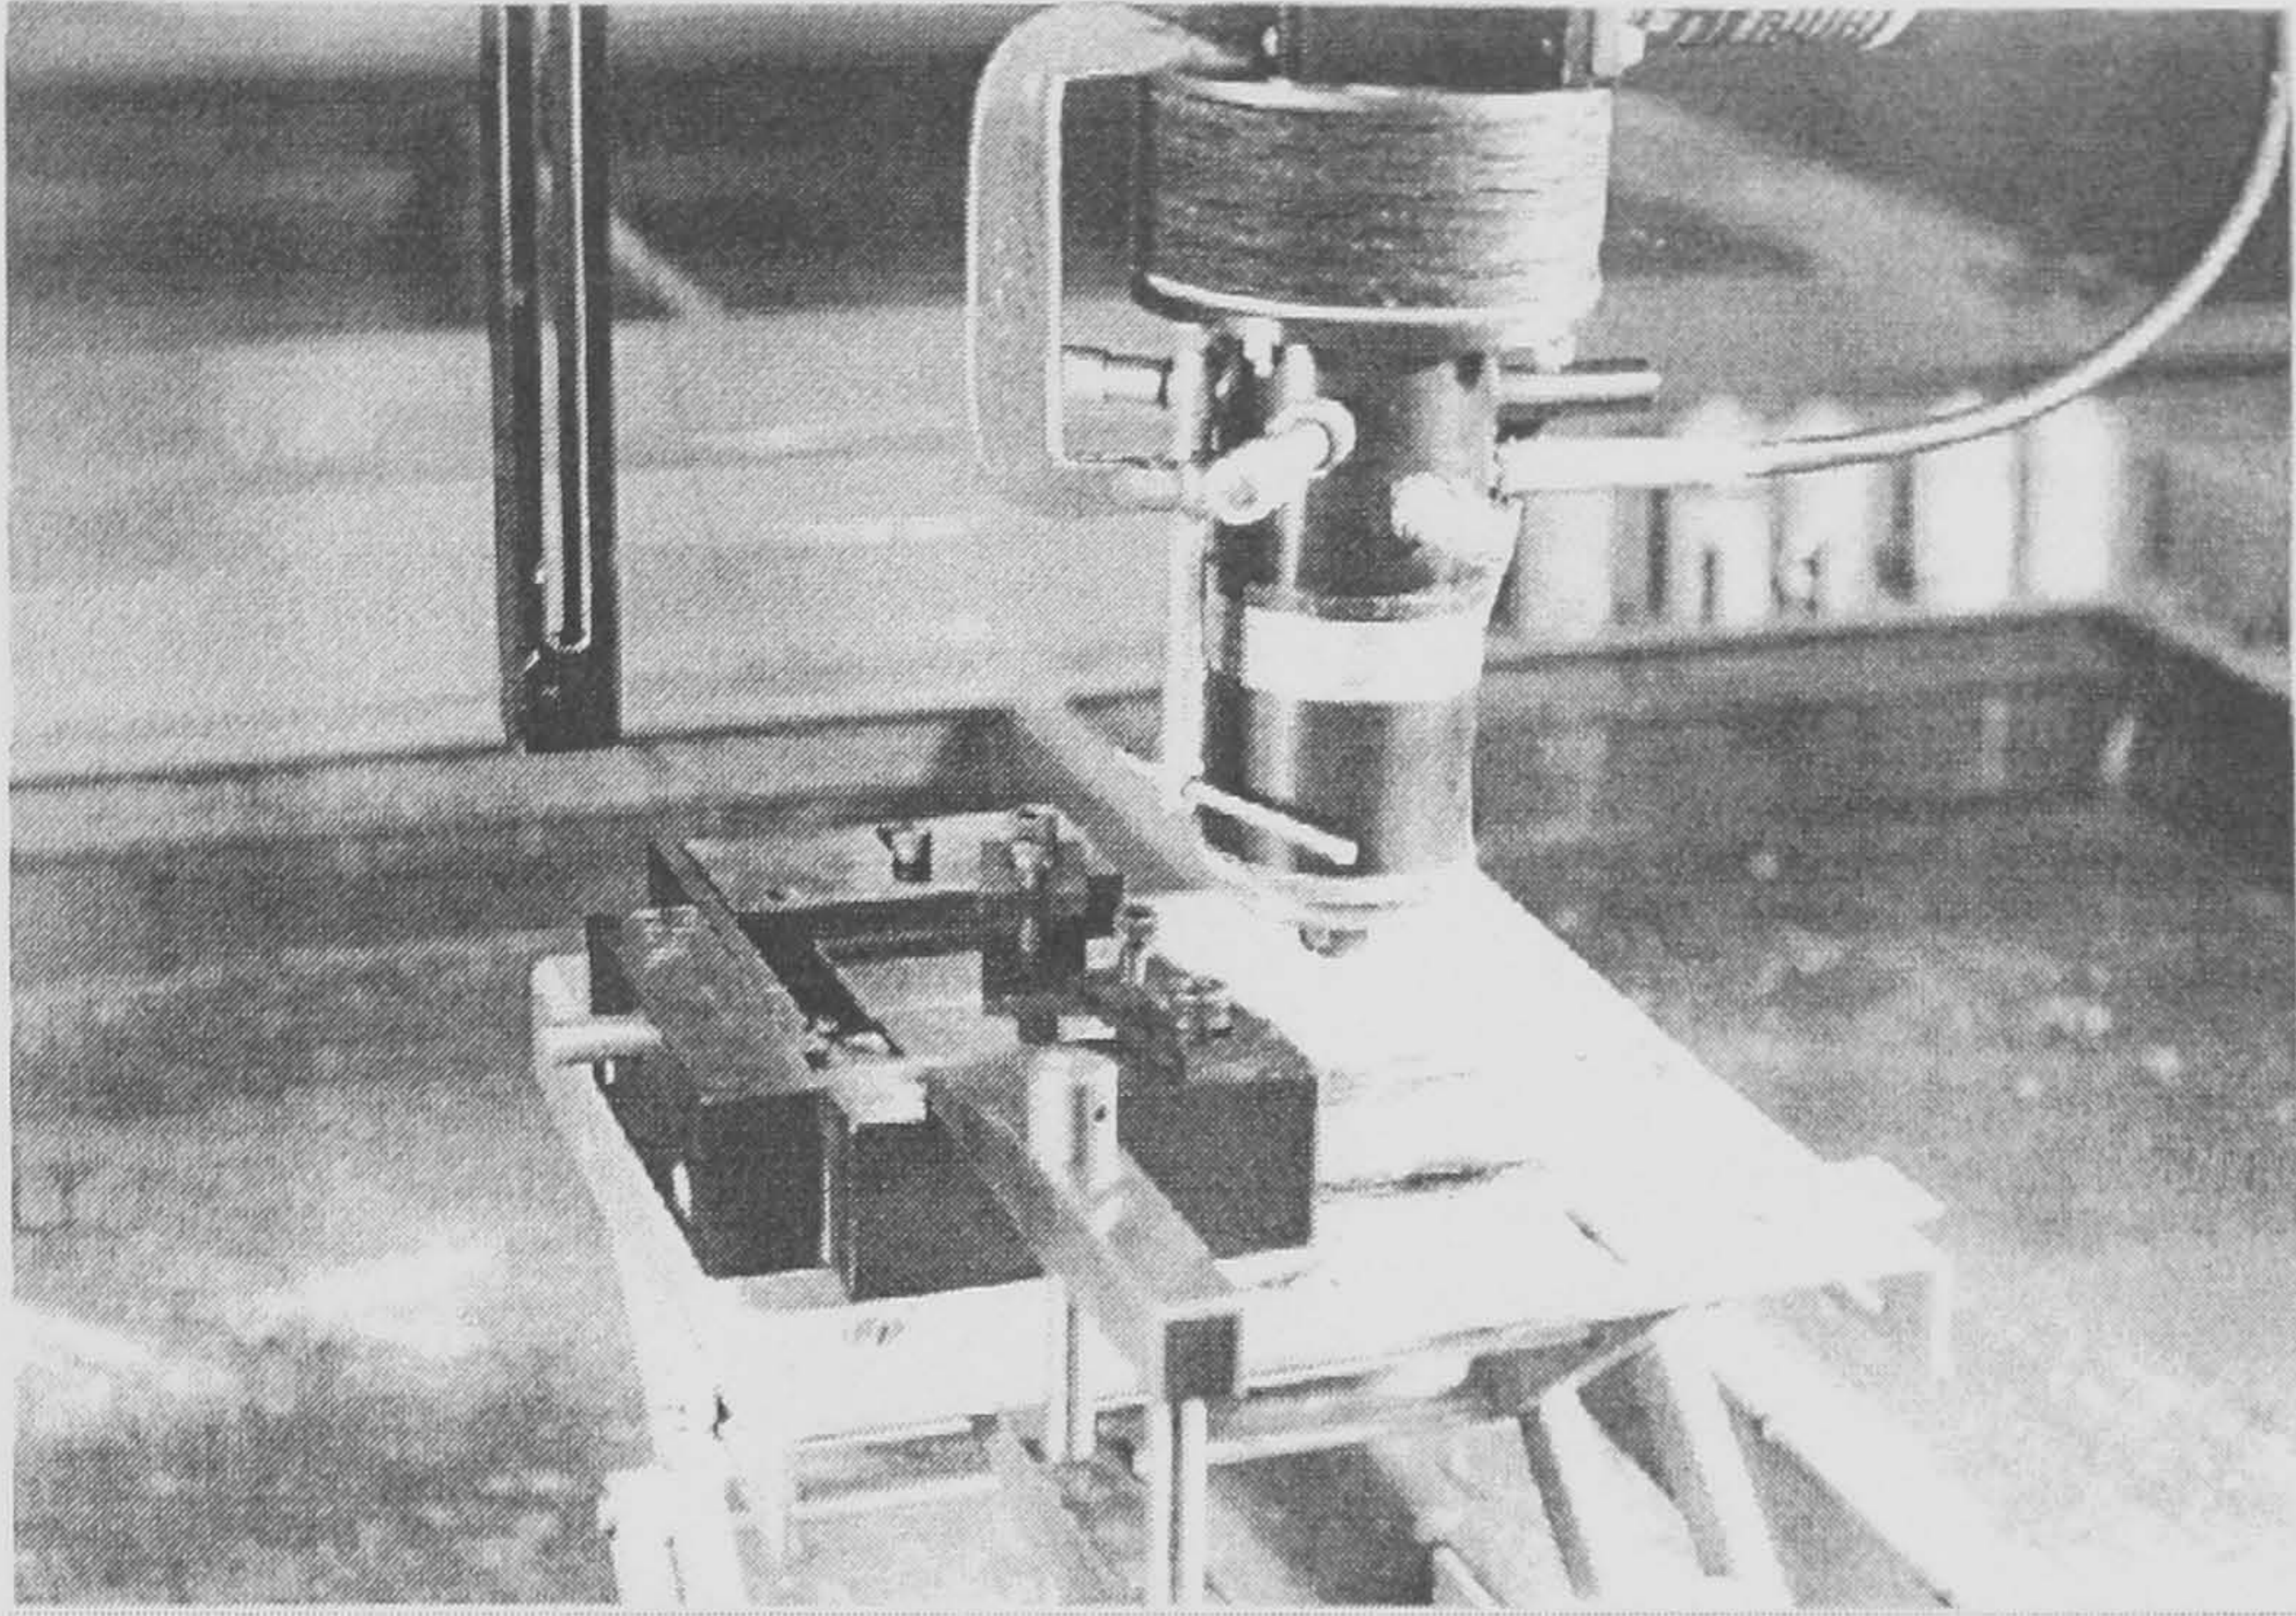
An improved clamped geometry used for CO₂ laser welding
